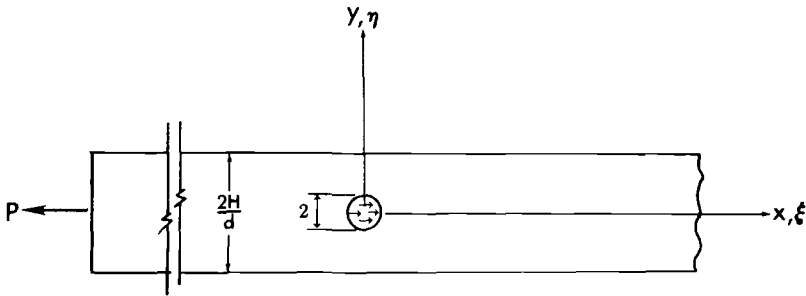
Mathematical model and coordinate system used in the stress analysis of spotweld. Dimensions are in units of spotweld radius.
